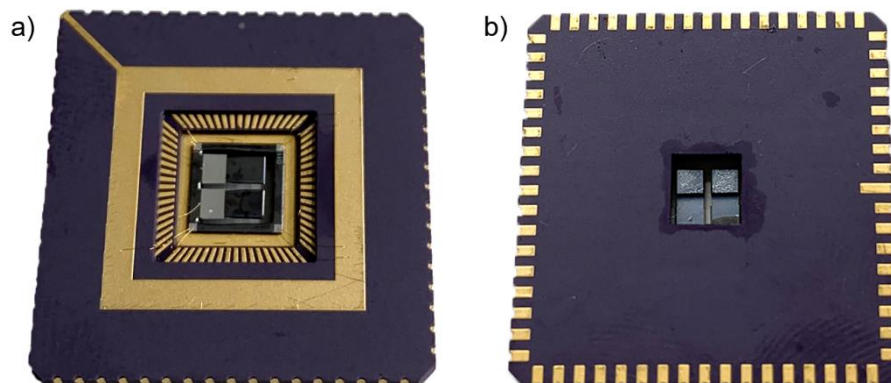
Fabricated PEH mounted in LCC68: (a) top view; (b) bottom view showing hole and PEH mass.
